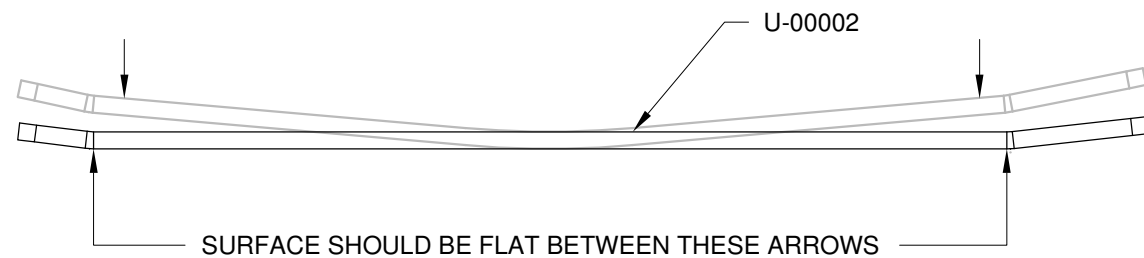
STRAIGHTENING THE WHEEL FAIRING BRACKETS
